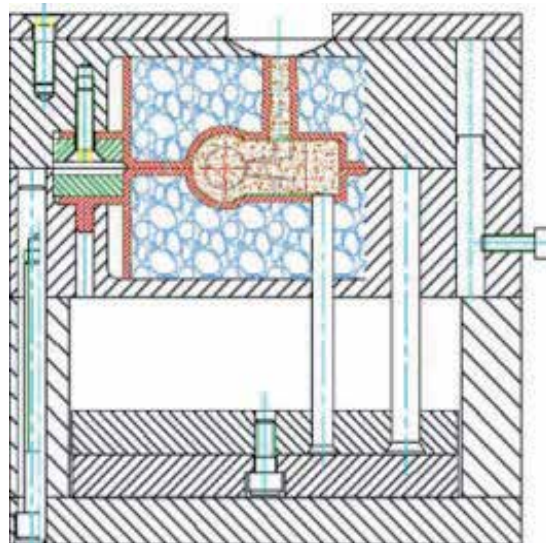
Wax injection moulding tool of Peugeot engine gearbox shift fork
